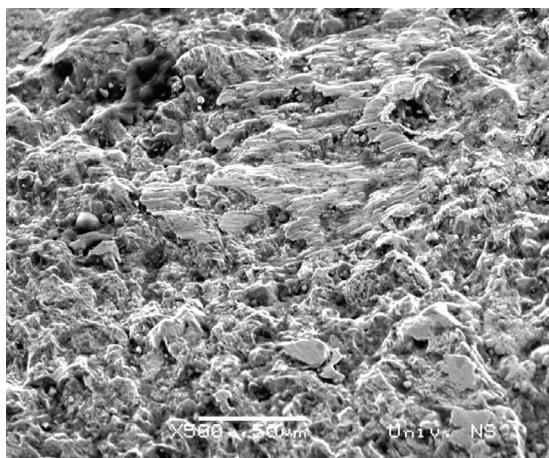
Oxidised surface in fatigue crack propagation zone
